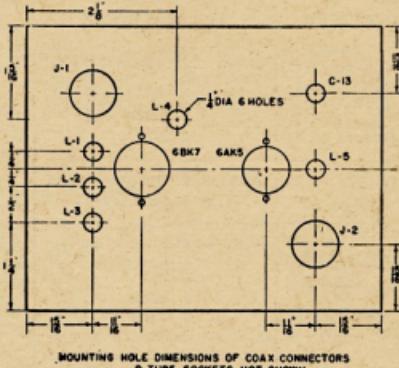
Panel layout of the S/N-6 Pre-Amplifier (back elevation).
